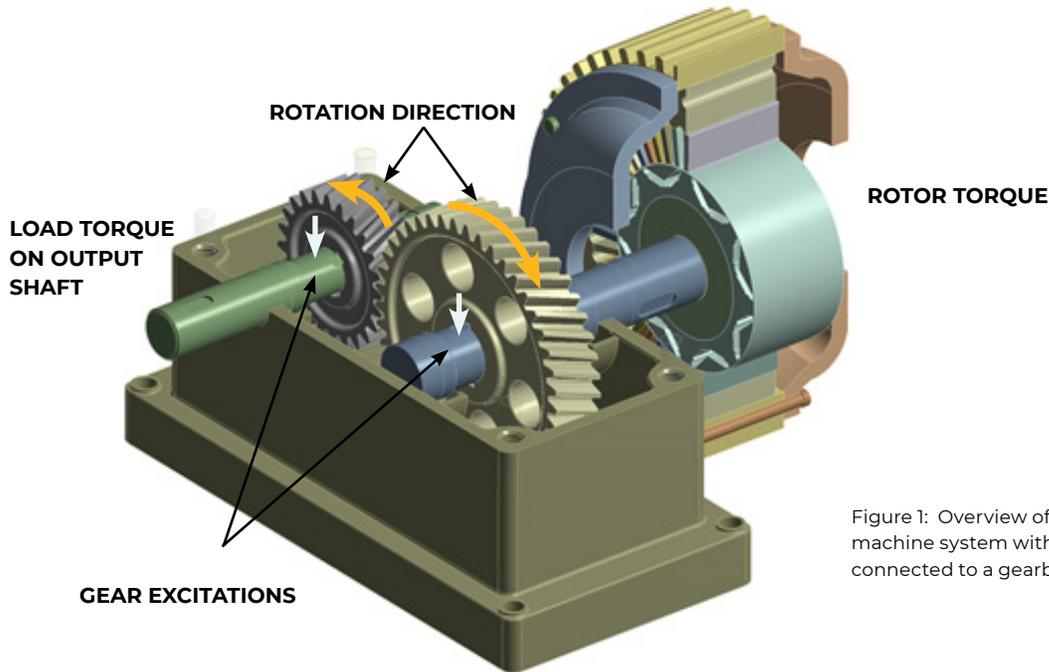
Overview of an electric machine system with the motor shaft connected to a gearbox.
